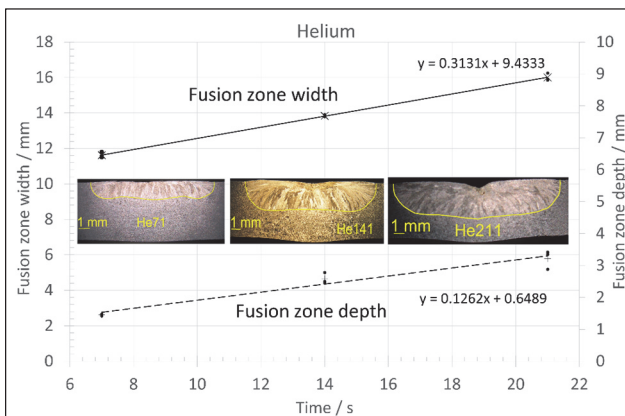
Weld penetration depth and width obtained in experiments with helium as the purging gas (4 l/min) for 7 s, 14 s and 21 s welding time
